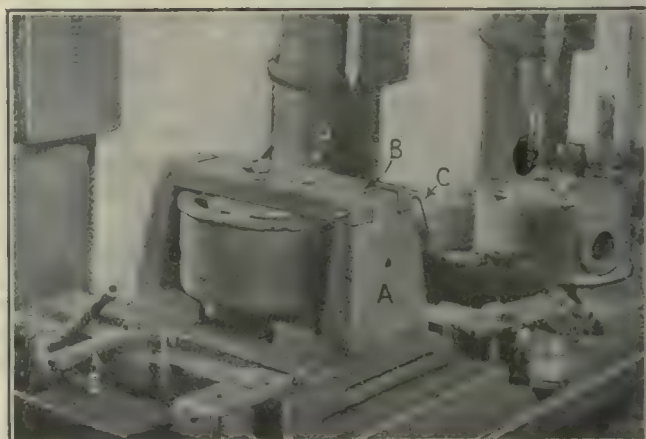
SLIDING DRILL JIG FOR CYLINDER HEADS
